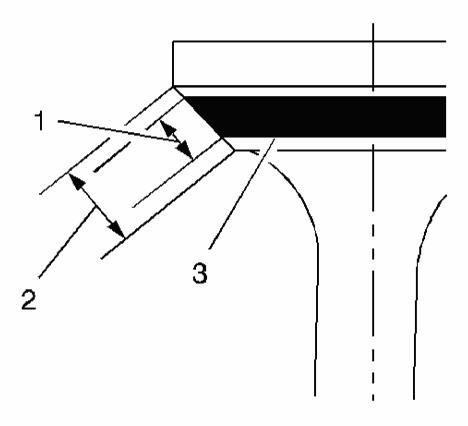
View Of Valve Contact Face Measurements Courtesy of GENERAL MOTORS CORP.
